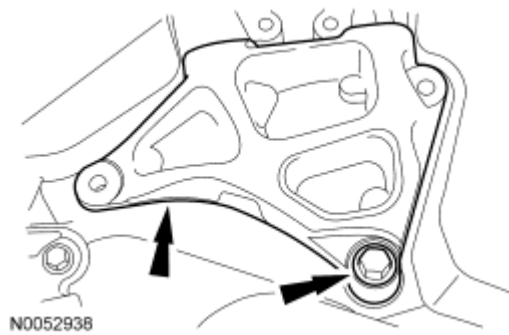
Locating Lower Engine Mount Bracket Bolt
